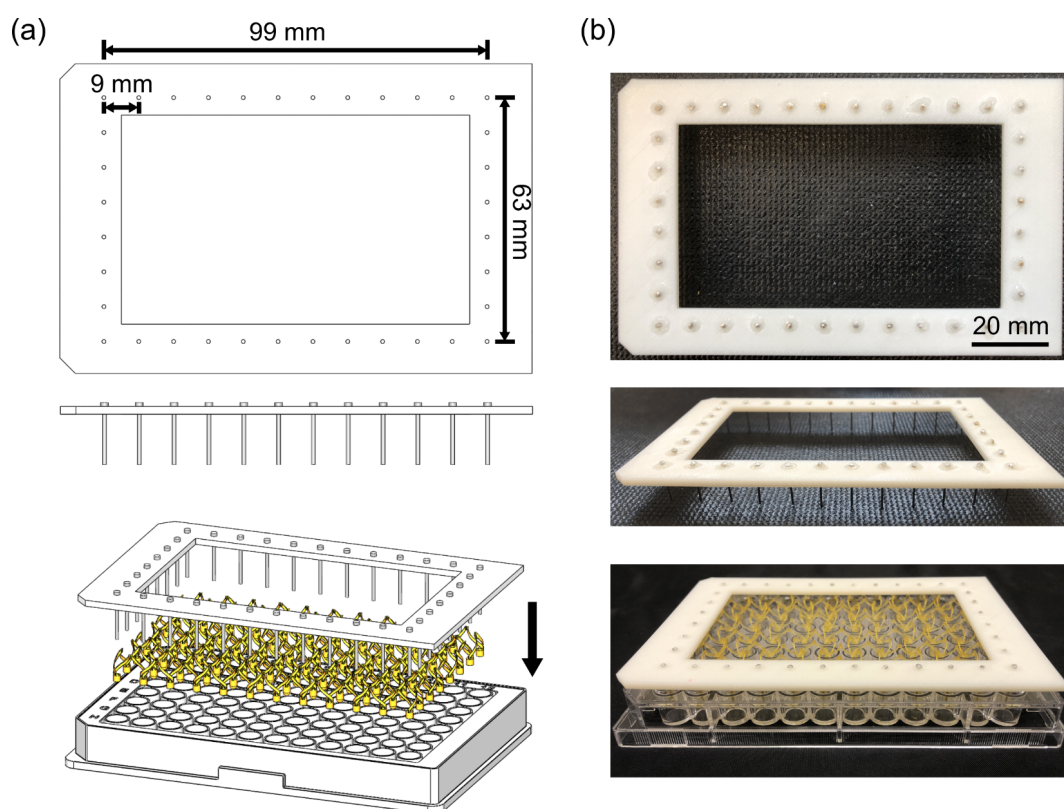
Mounting fixture for TTA. (a) Design of the fixture. (b) TTA mounted on a 96-well plate using the fixture. Scale bar is 20 mm.
